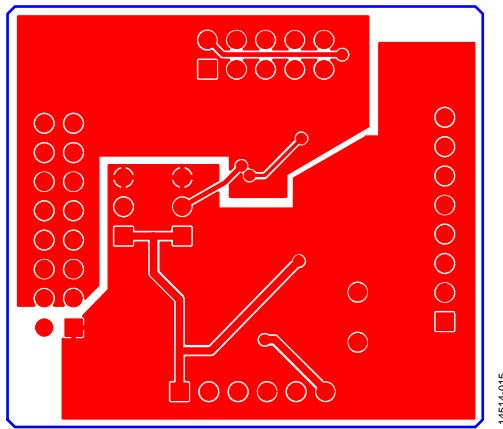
EVAL-AD5338RDBZ Daughter Board Bottom Side Routing
